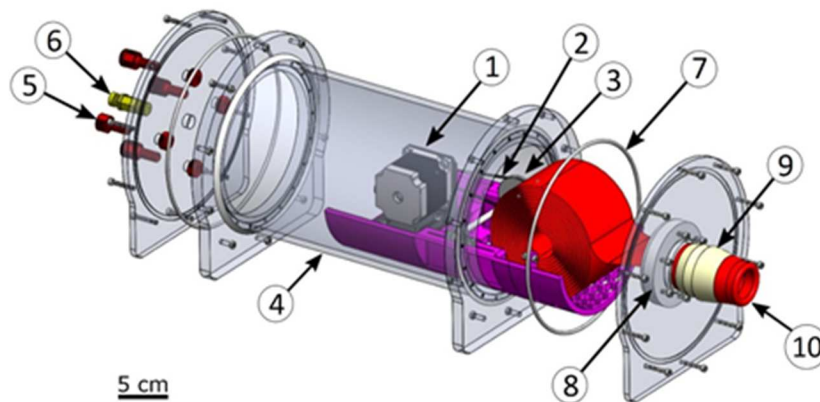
Exploded 3D model of the robot system. Mechanical drivetrain: 1) stepper motor, 2) timing belt, 3) pulley. Pressure chamber: 4) pressure chamber housing, 5) bolt penetrators, 6) pressure relief valve, 7) O-ring coated with grease, 8) bolted pressure seal adapter, 9) latex clamp. Soft robot body: 10) nylon fabric membrane.
